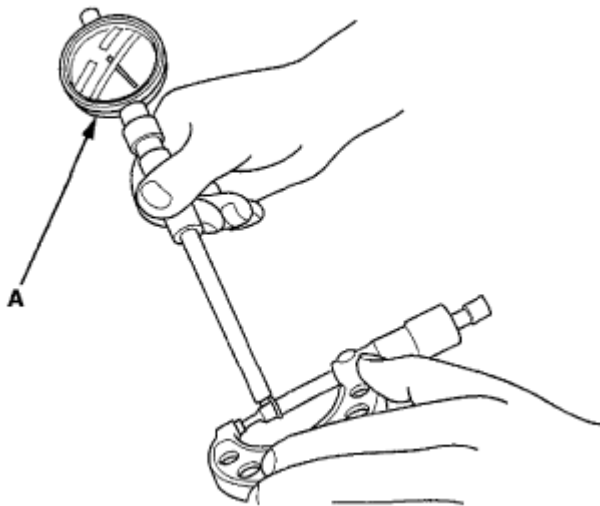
Setting Gauge To Zero At Shaft Diameter
